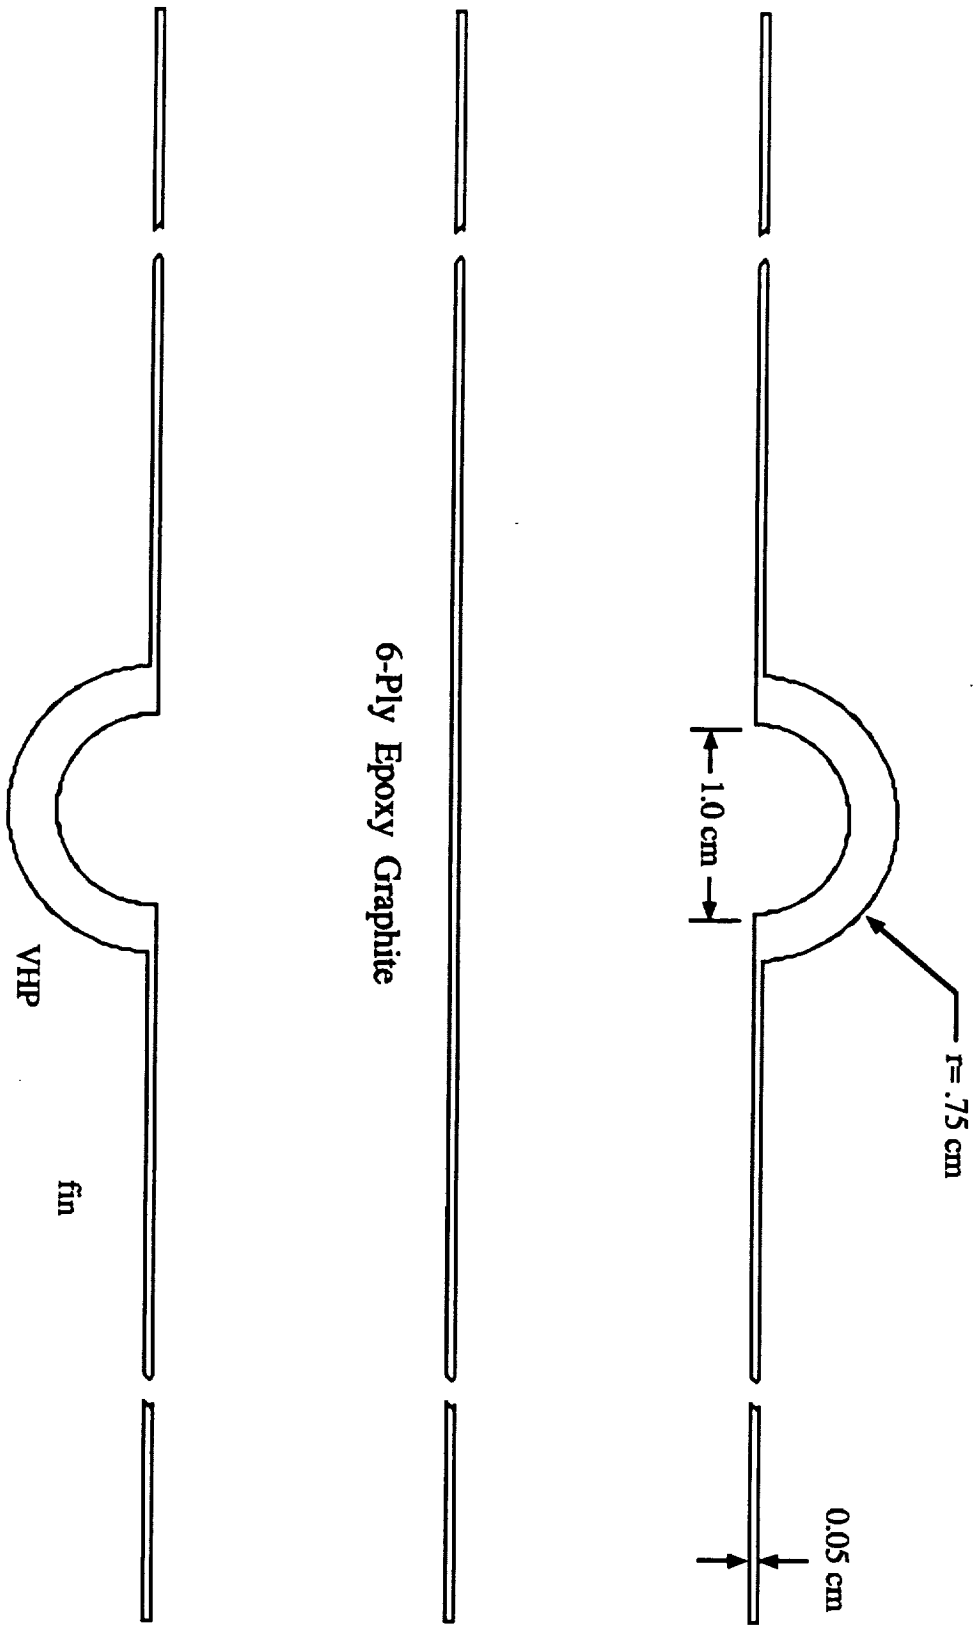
Exploded view of vertical heat pipe and fin.
